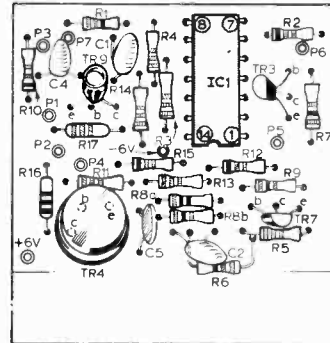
Component layout on the printed circuit board of amplifier "A"
